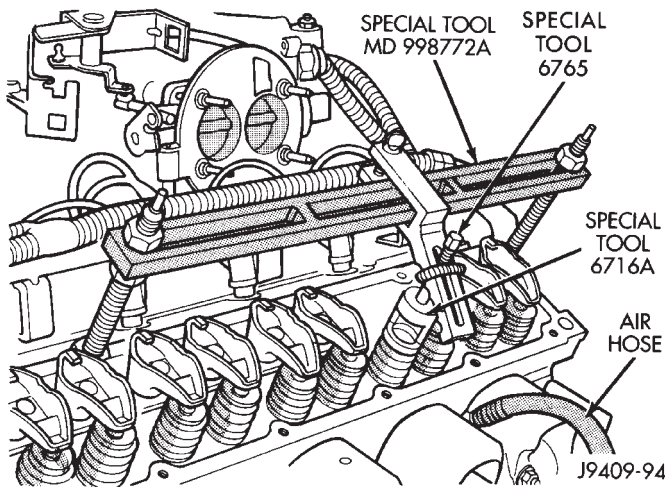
Valve Spring Compressor MD-998772A with Adaptor 6716-A and Screw 6765
